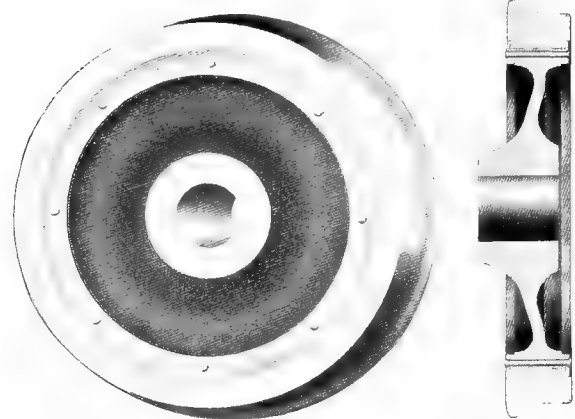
Cast Steel Plate Center with Tire Held by Shrinkage, Double Lip Retaining Rings and Rivets.
